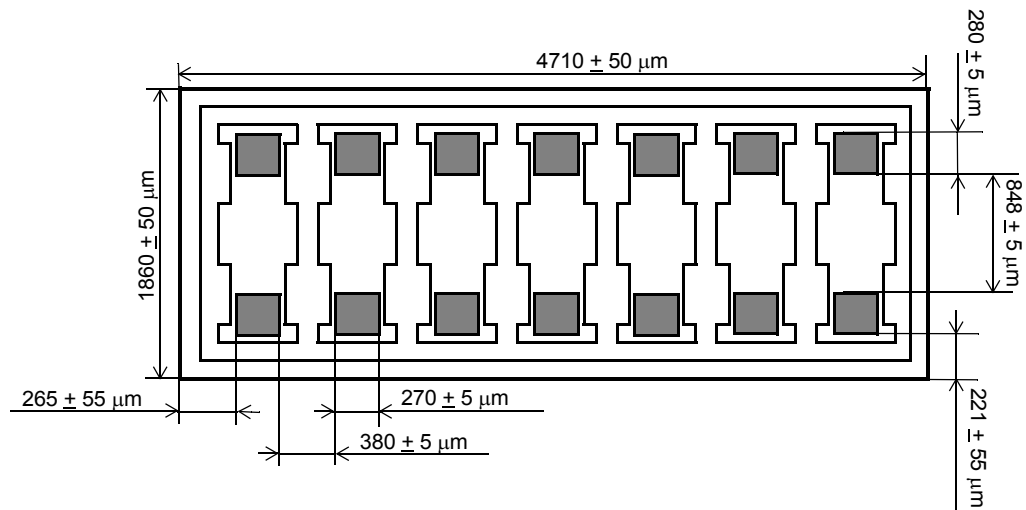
• Size and Bond Pad Placement of ZL70588
